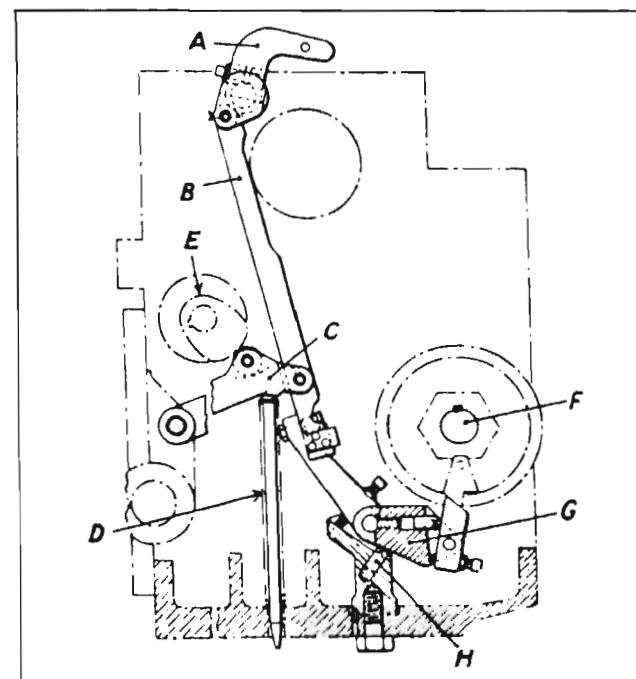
Mechanism for operating swing stop A on an automatic lathe to control axial feed of bar stock.
